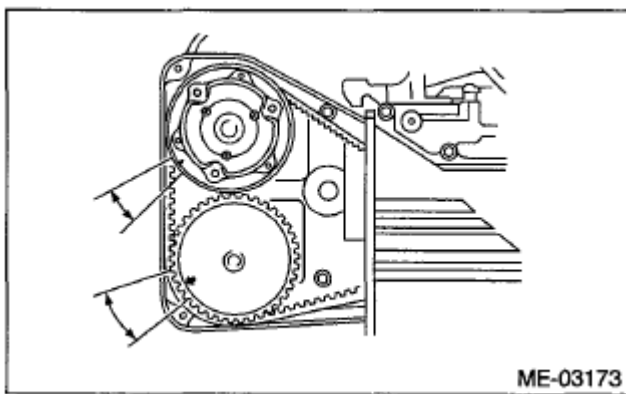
Measuring Clearance Of 2 Cylinder Intake Valve And 4 Cylinder Exhaust Valve
